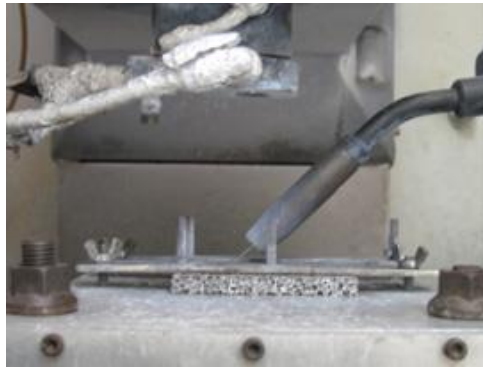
MIG welding process (Shih et al., 2011)
